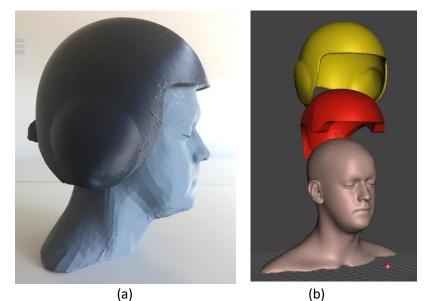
(a) Photo of a 3D printed demo. (b) The helmet contains a hard shell (yellow) and insertion (red) to improve the fitting.
